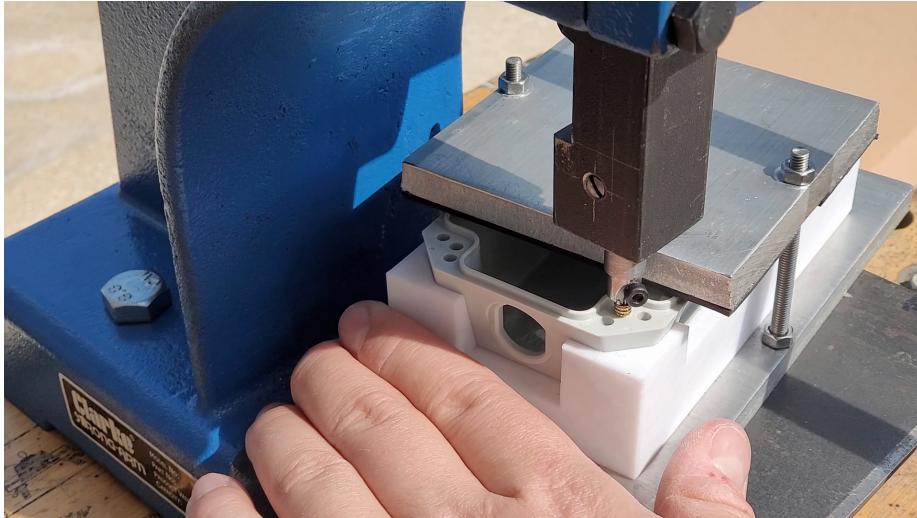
Pressing the threaded inserts into the lower surface of the lid
